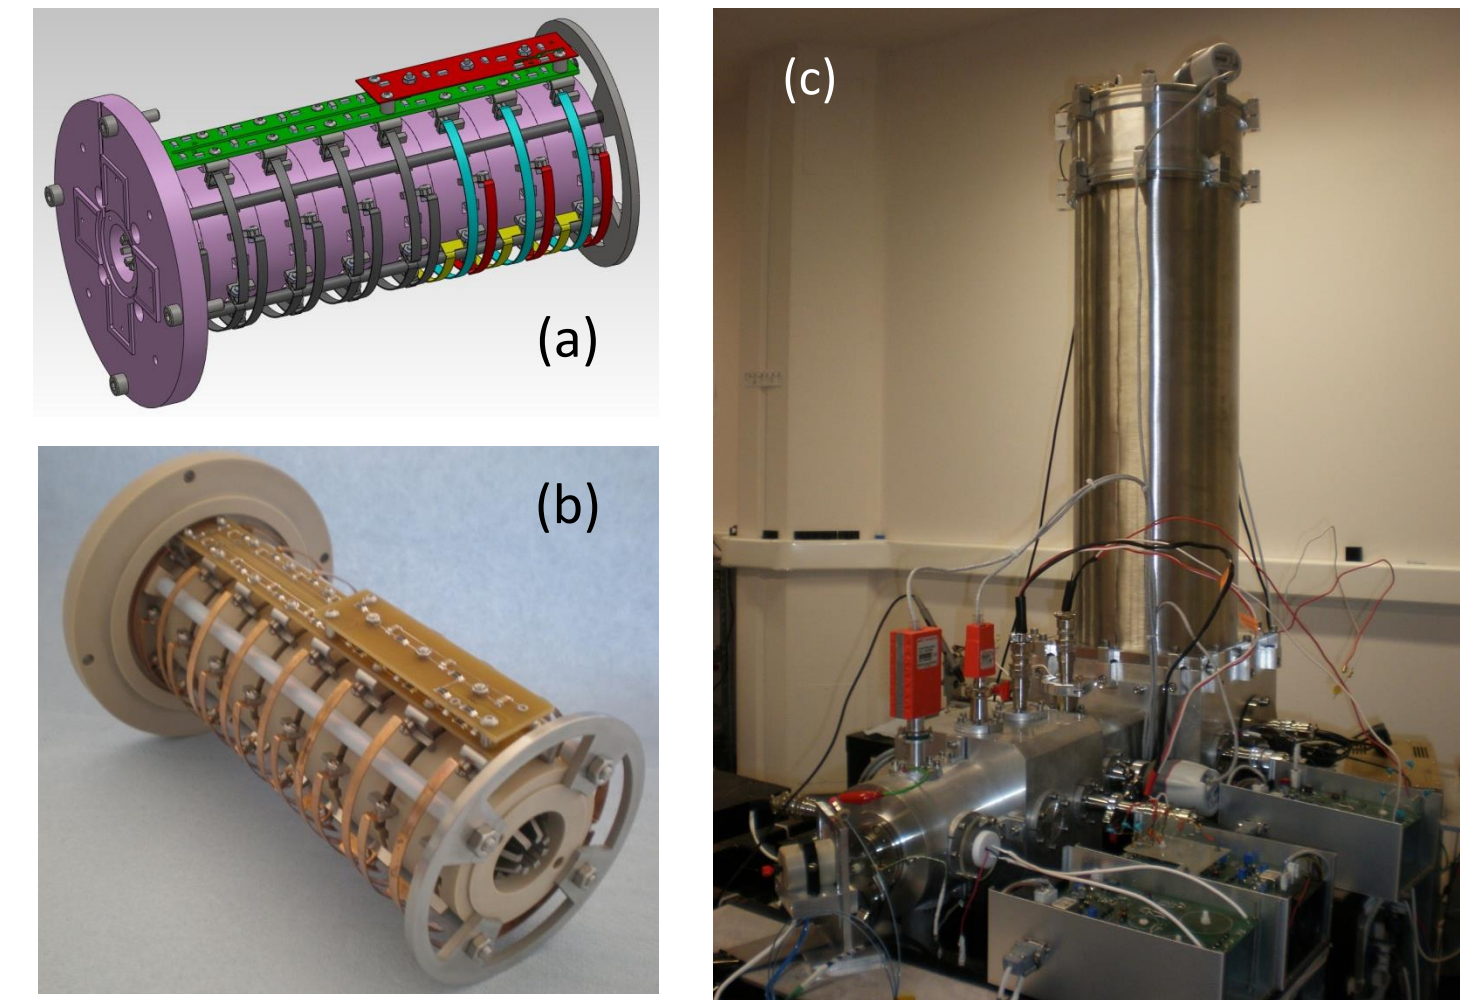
(a) 3D CAD model and (b) assembly of the segmented octapole ion guide. (c) prototype oTOF MS system incorporating the ion guide.
